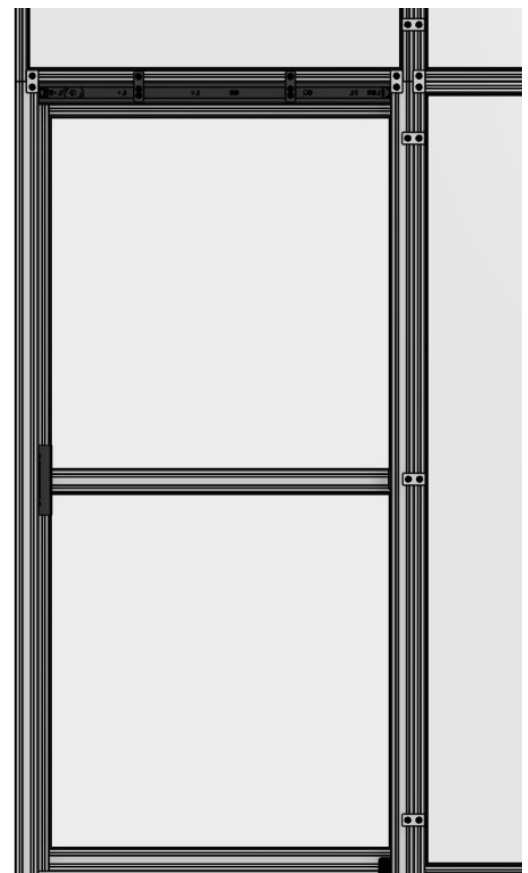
Fasten the U-Handle and Integrated Latch Handle to the door panel.
